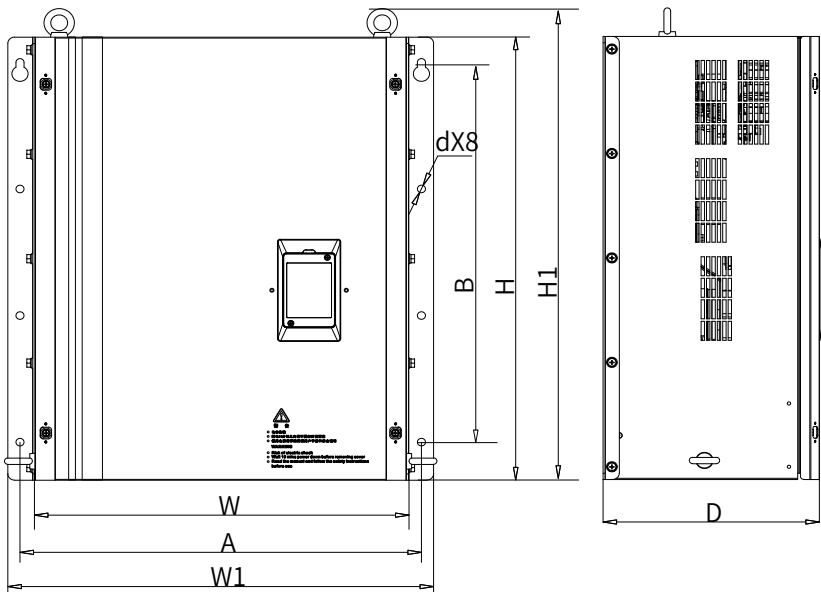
Appearance and dimensions of the CA300C AC drive (200-355 kW)
